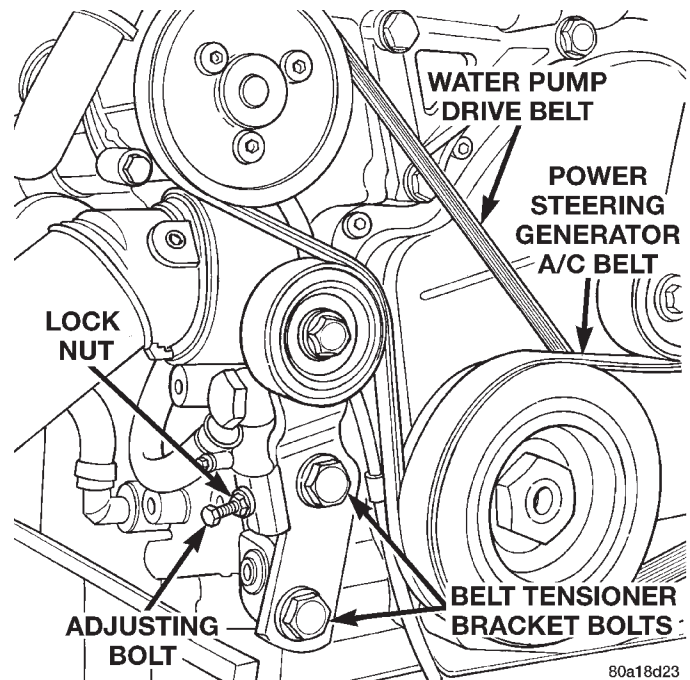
Water Pump Belt Removal — 2.5L VM Diesel
